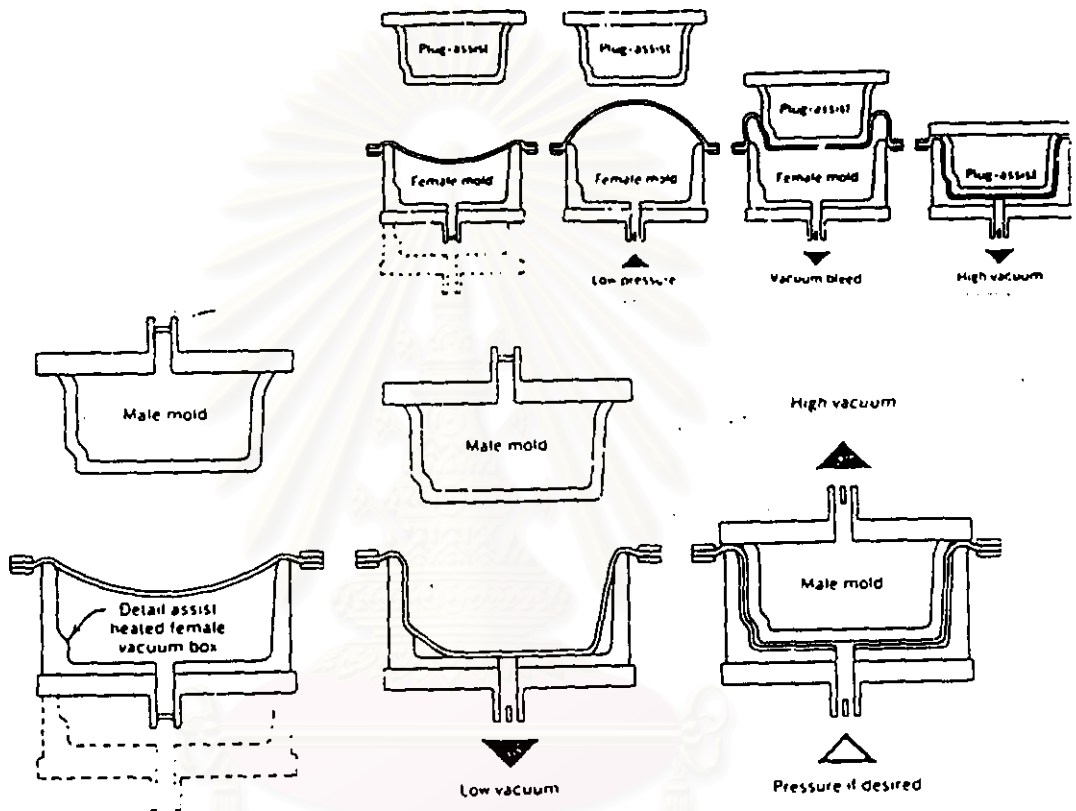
Male mould and Female mould of Thermoforming process [Glenn, 1996]
